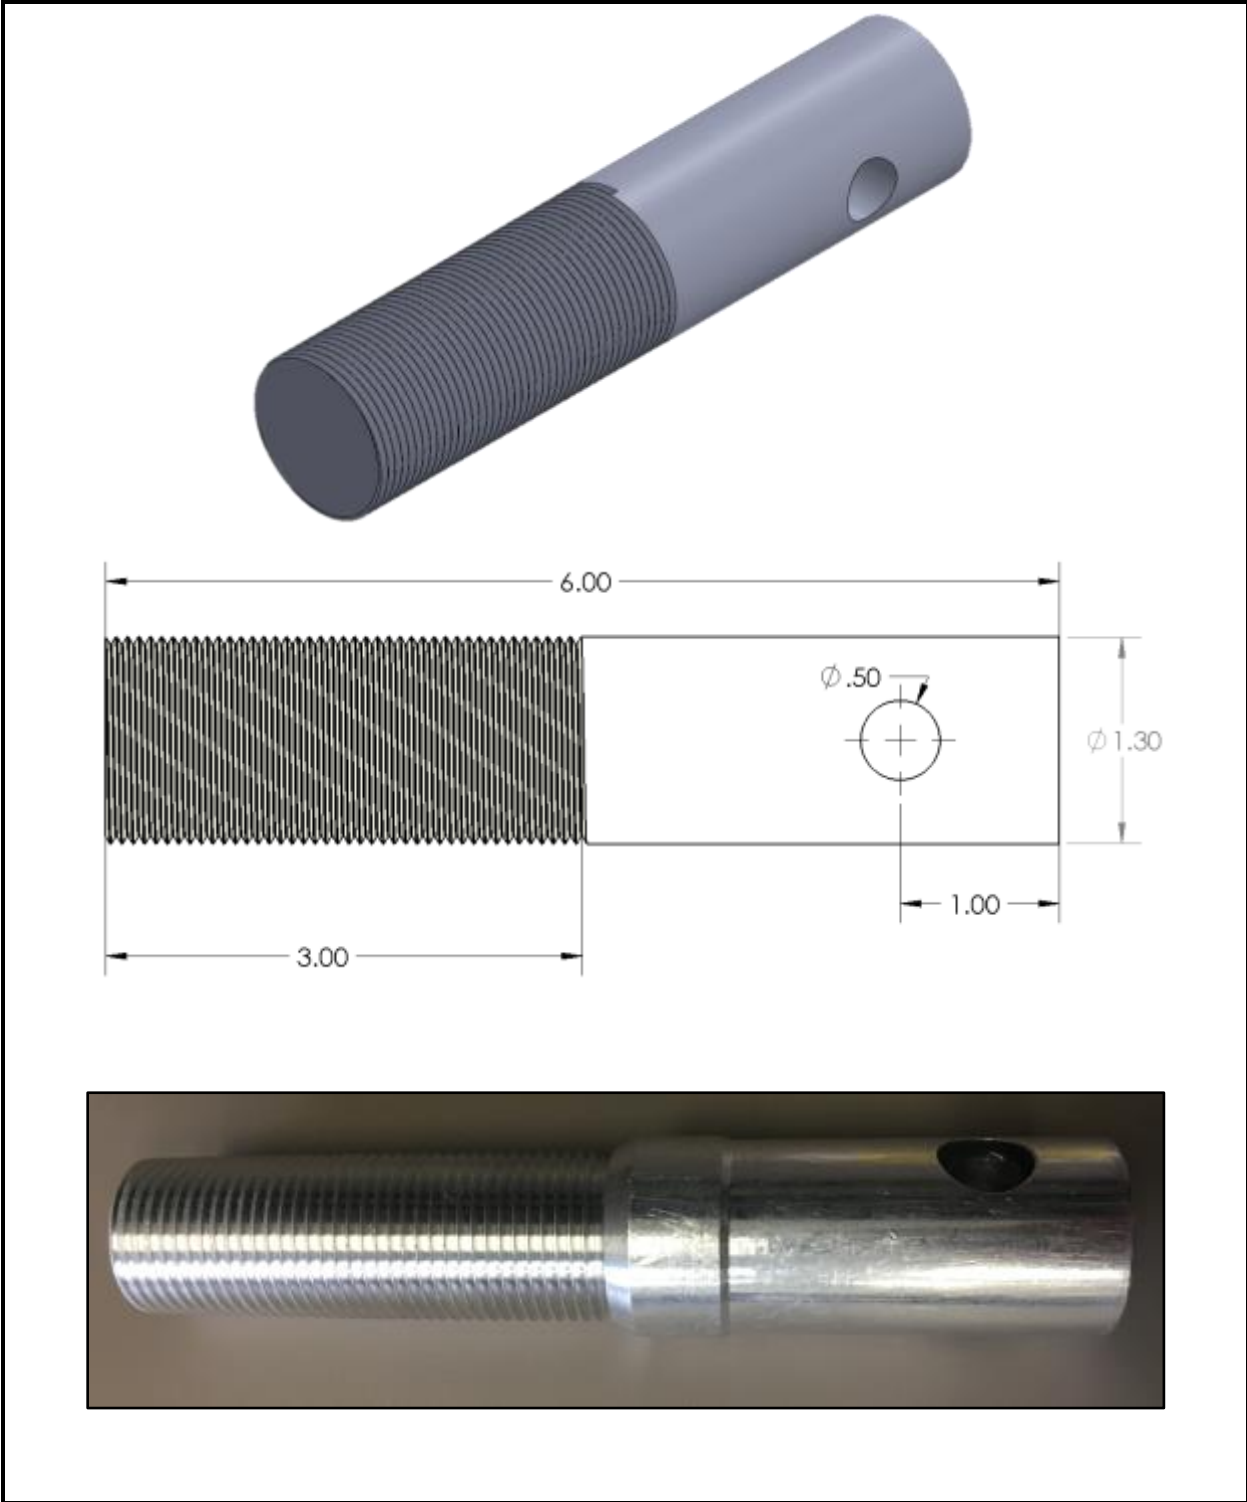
A threaded fixture designed for tensile testing on the actual pipes (dimensions are based on inches)
